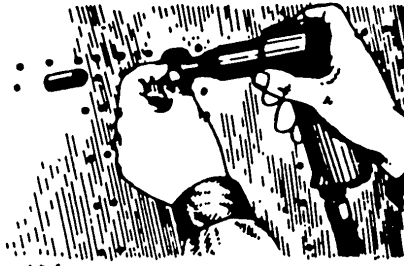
Examples of Riveting Work. The Left Hand Inserts the Rivet;
